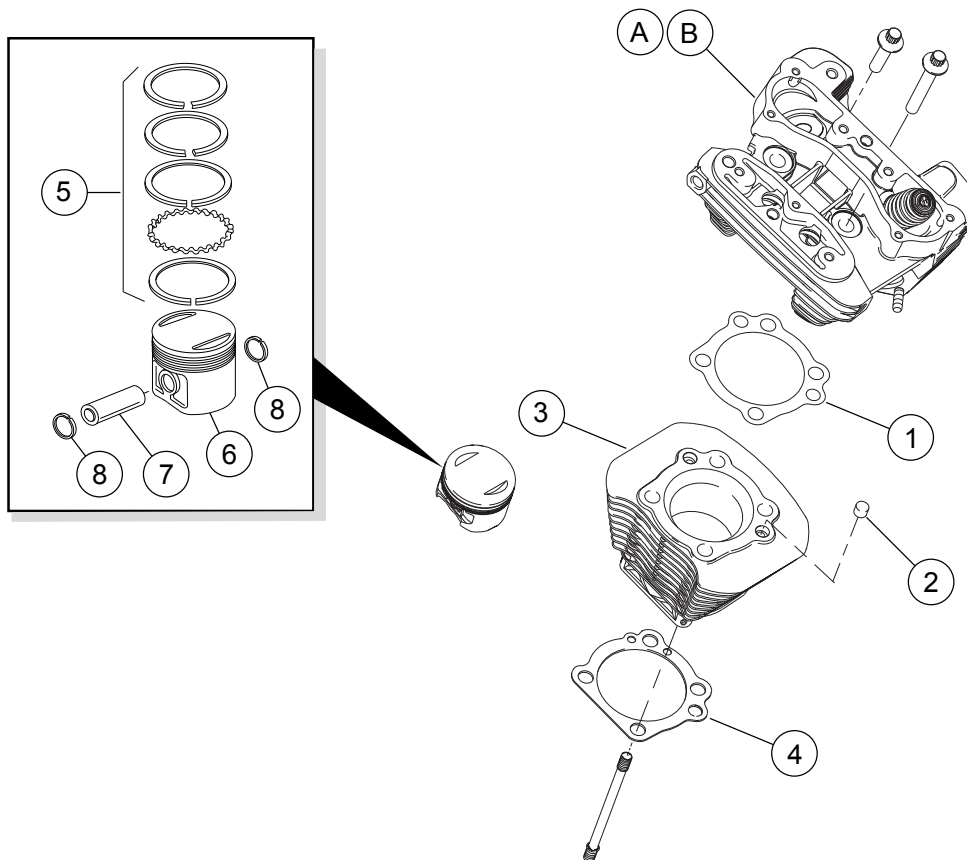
Service Parts: Screamin' Eagle XL 833 to 1200 Conversion Kit
